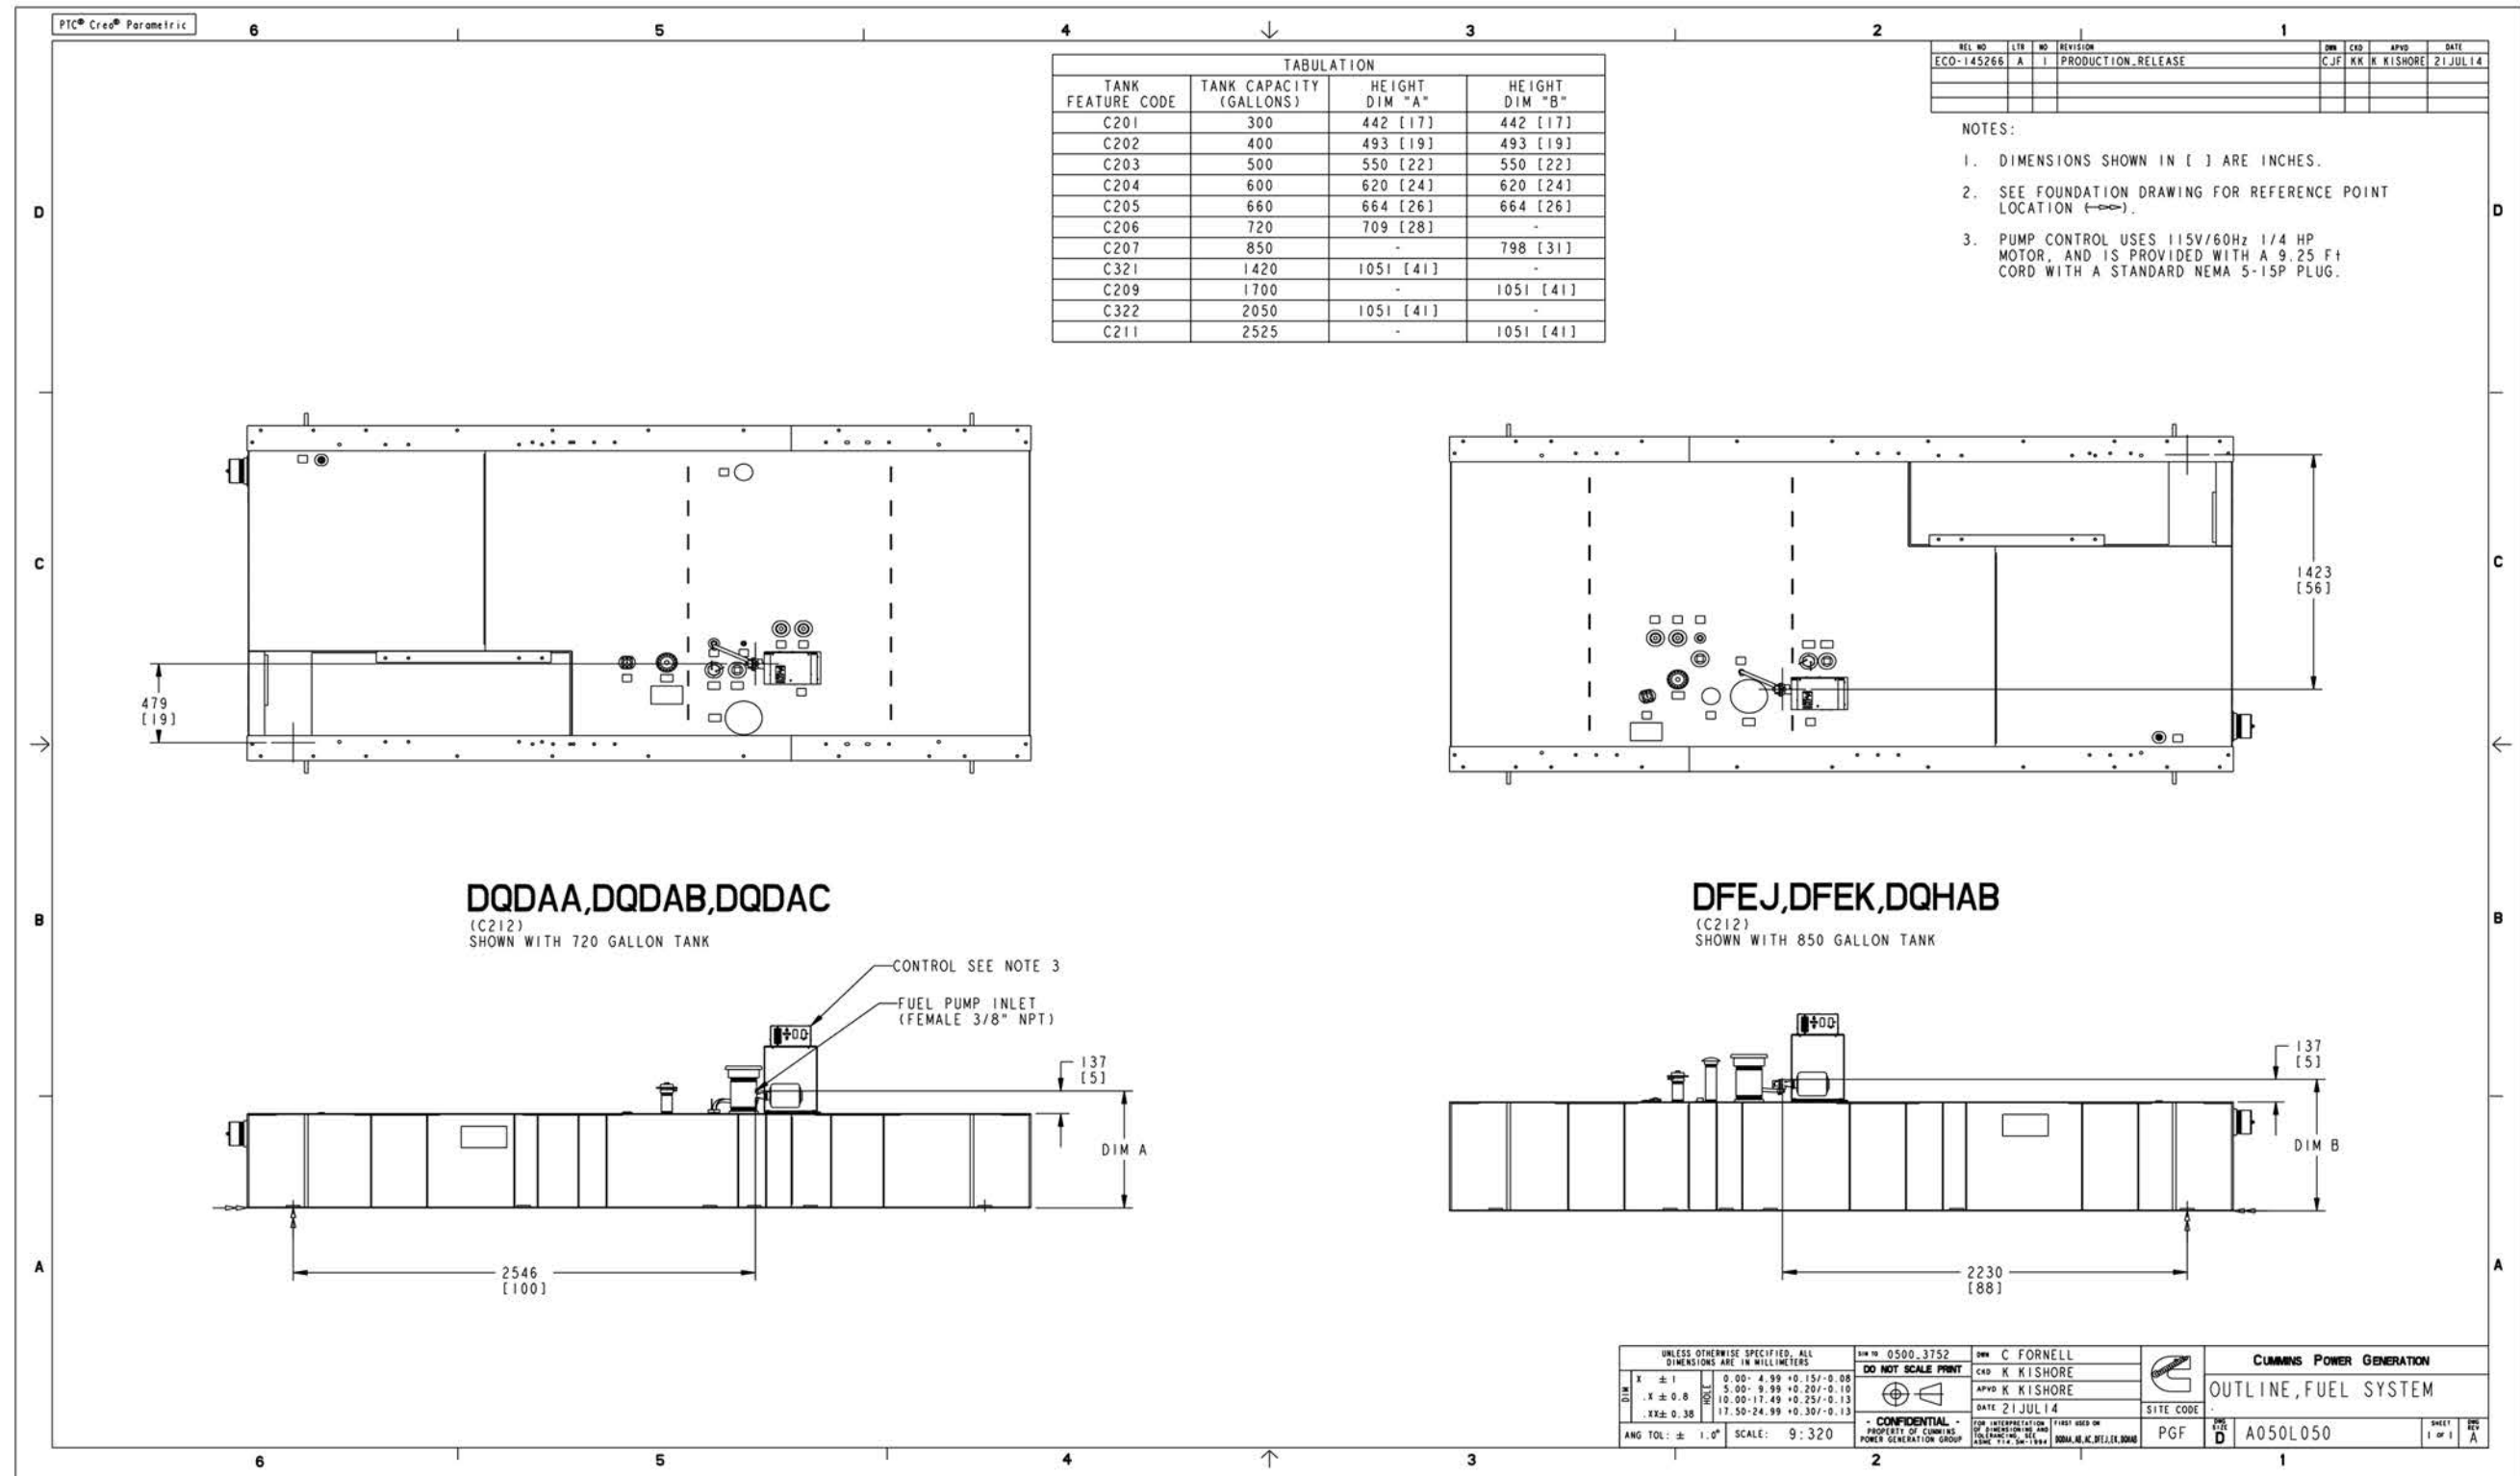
FUEL SYSTEM OUTLINE DRAWING
